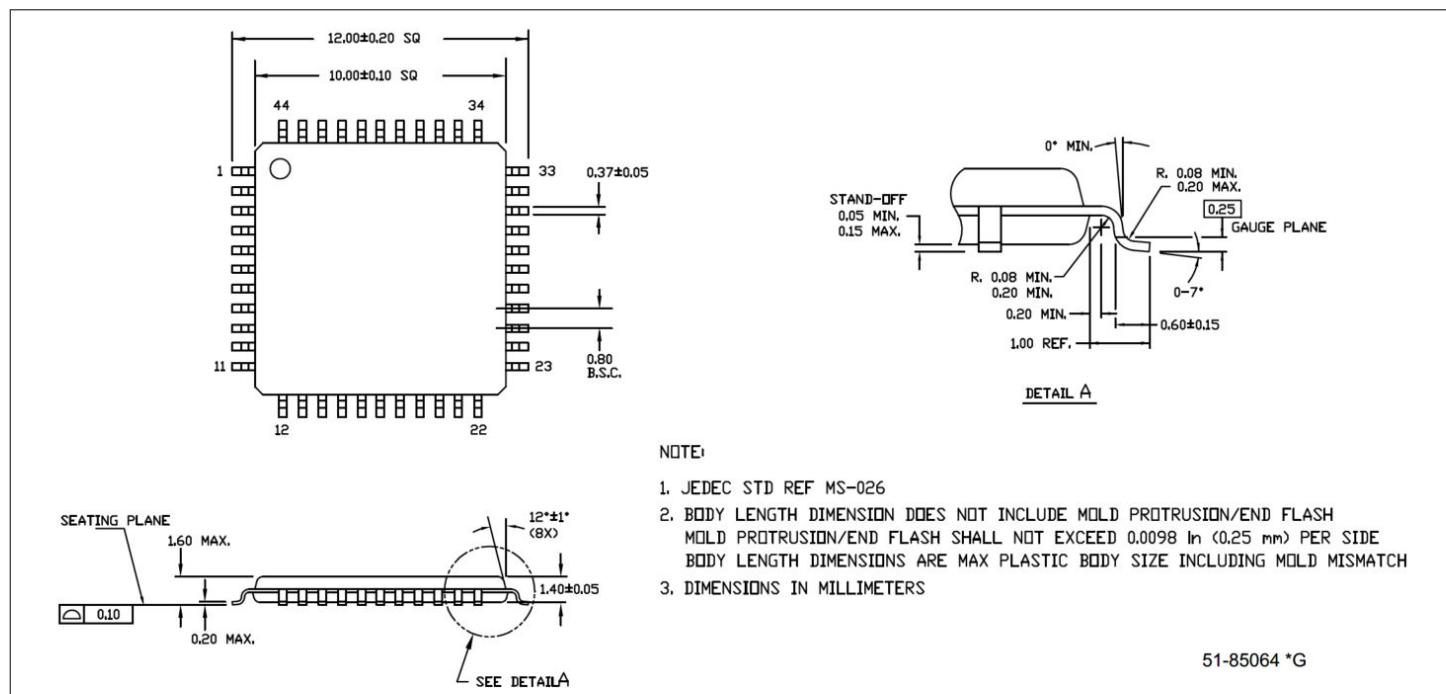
44-Pin 10 × 10 × 1.4 mm TQFP package outline (PG-TQFP-44)
